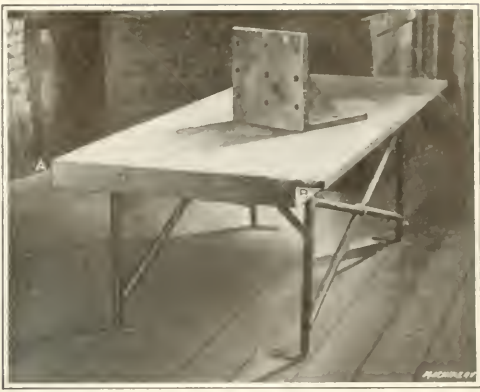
Another View of Welding Table and Angle Plate
